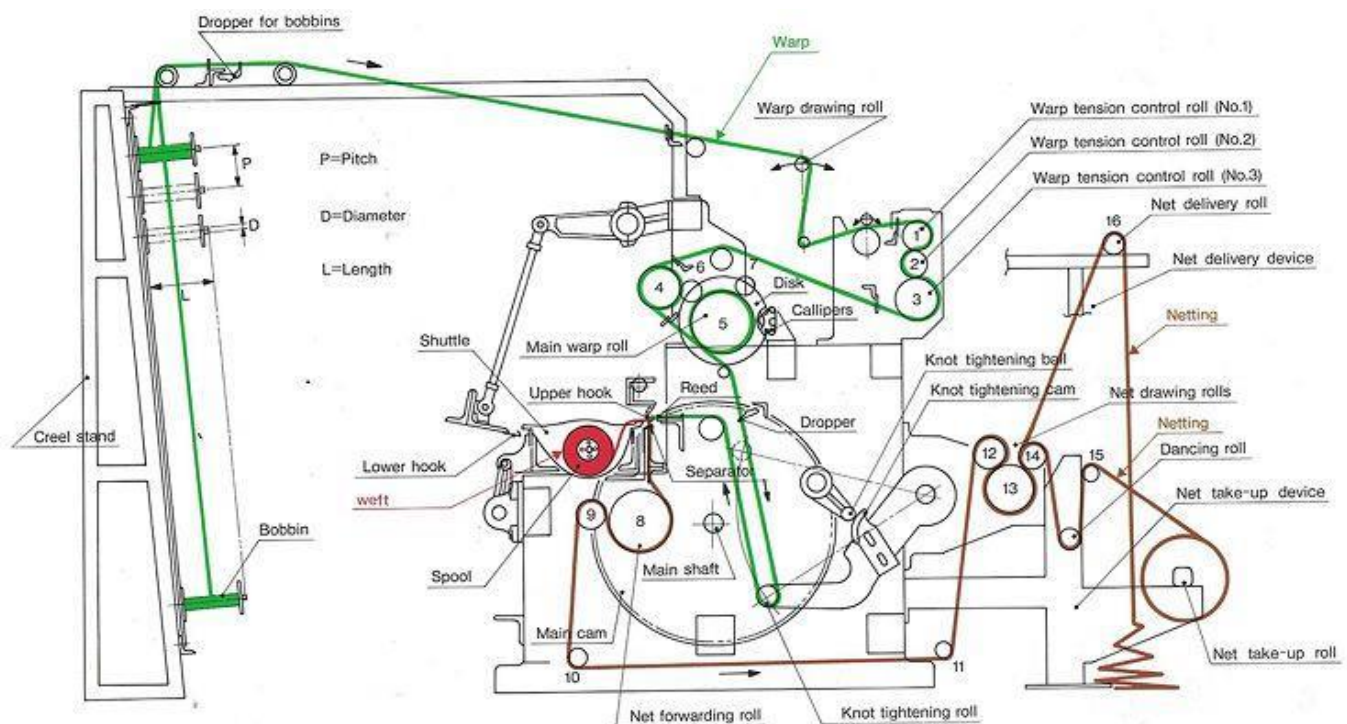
General scheme of a knotted fishing net machine (Yangzhou Haili Precision Machinery Manufacturing Co., Ltd., 2025¹)
